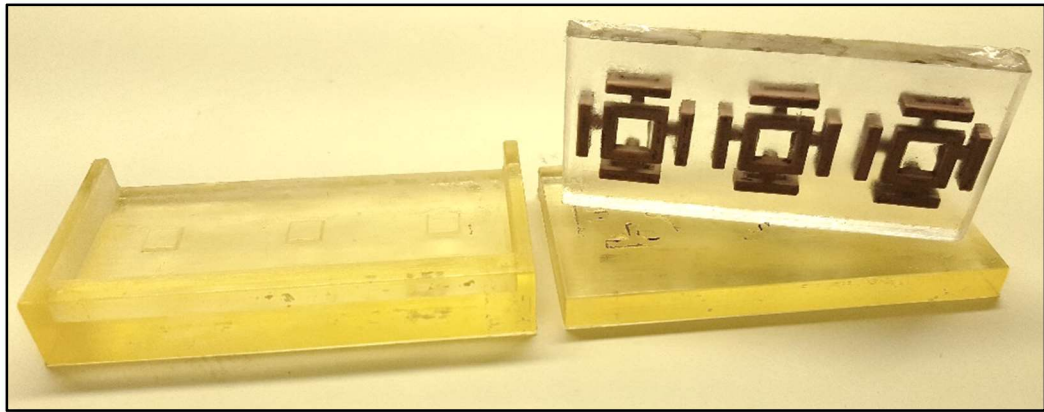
Cured 3D FSS waveguide sample, removed from 3D printed mold.
